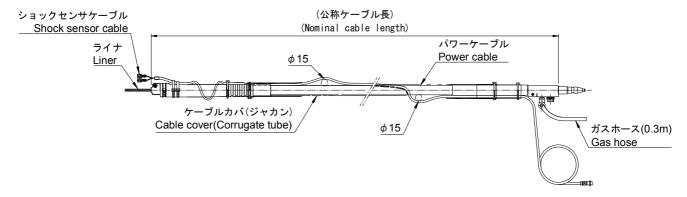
Outline drawing of the coaxial power cable (For NB4/NB4S/NB4L/NB4LS manipulator)
